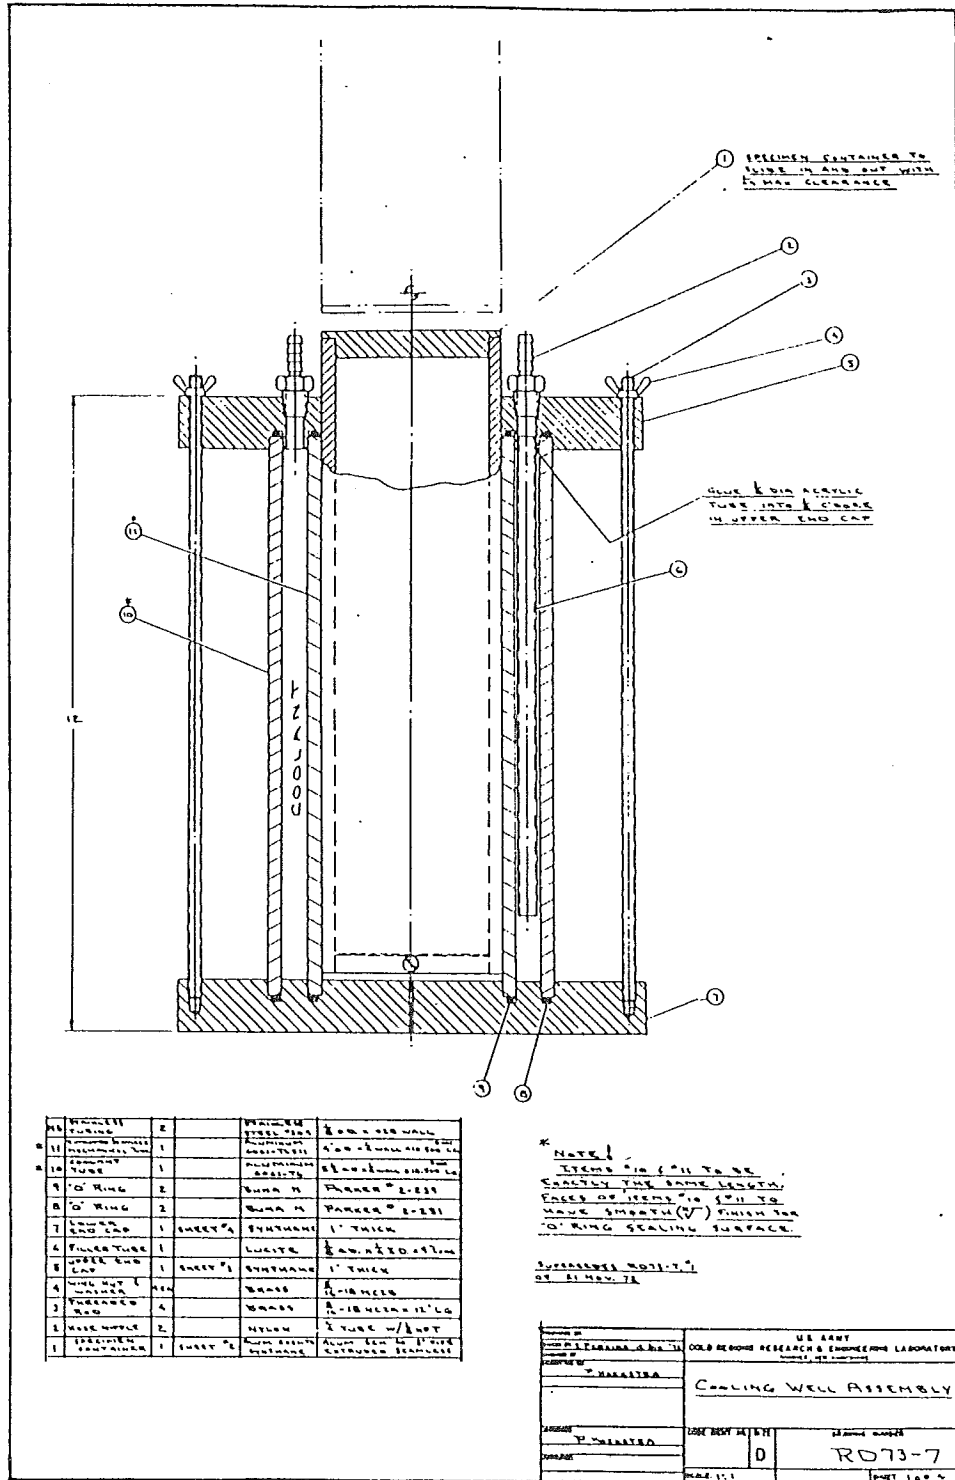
Machine Drawing of Sample Holder and Mold (after Hoekstra, et al, 1973)
